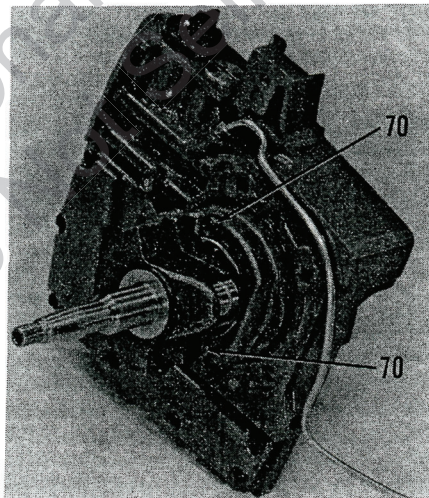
B—View showing crankcase removed from drive case and crankshaft on models equipped with ball bearing at drive end of crankshaft. To remove crankshaft from drive case, bearing retaining screws (70) must first be removed
